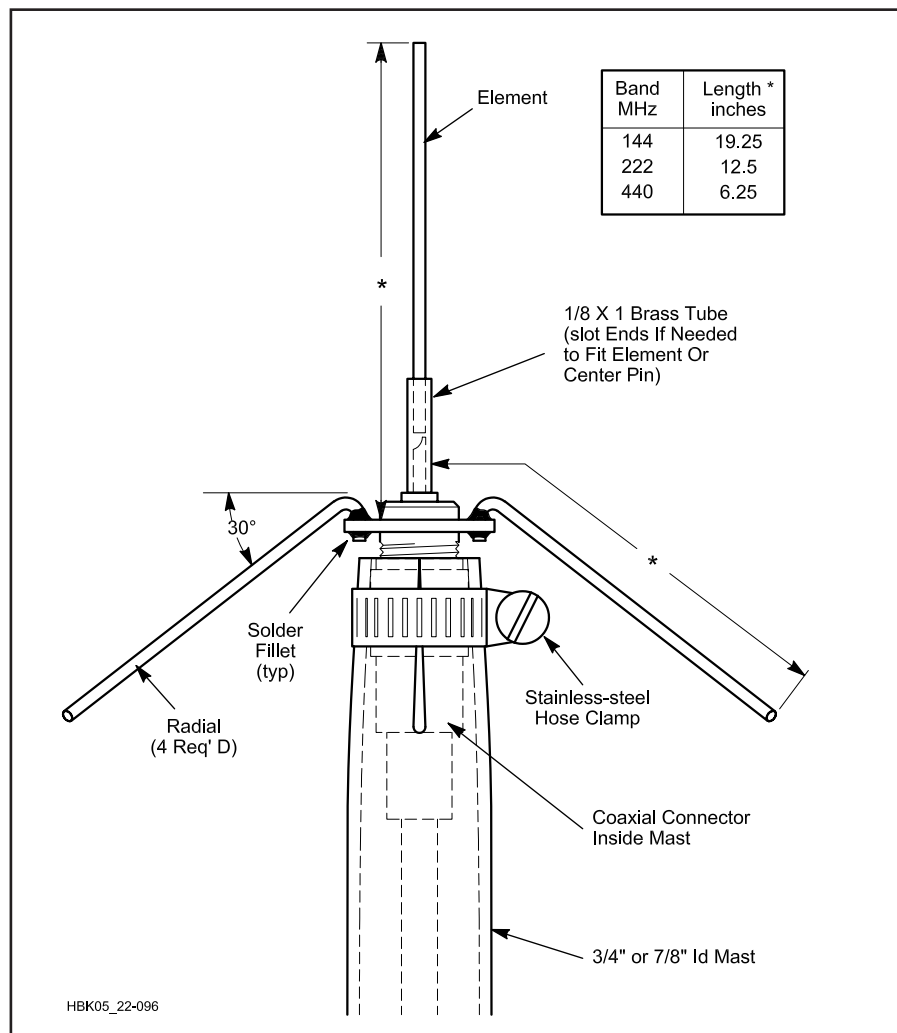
A simple groundplane antenna for the 144, 222 or 440-MHz bands. The feed line and connector are inside the mast, and a hose clamp squeezes the slotted mast end to tightly grip the plug body. Element and radial dimensions given in the drawing are good for the entire band.
